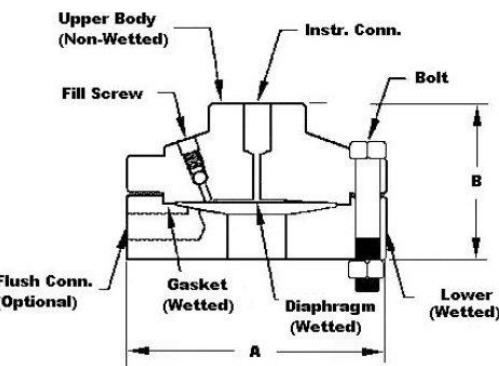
Seal Dimensions (Threaded Process Connection Seals)
